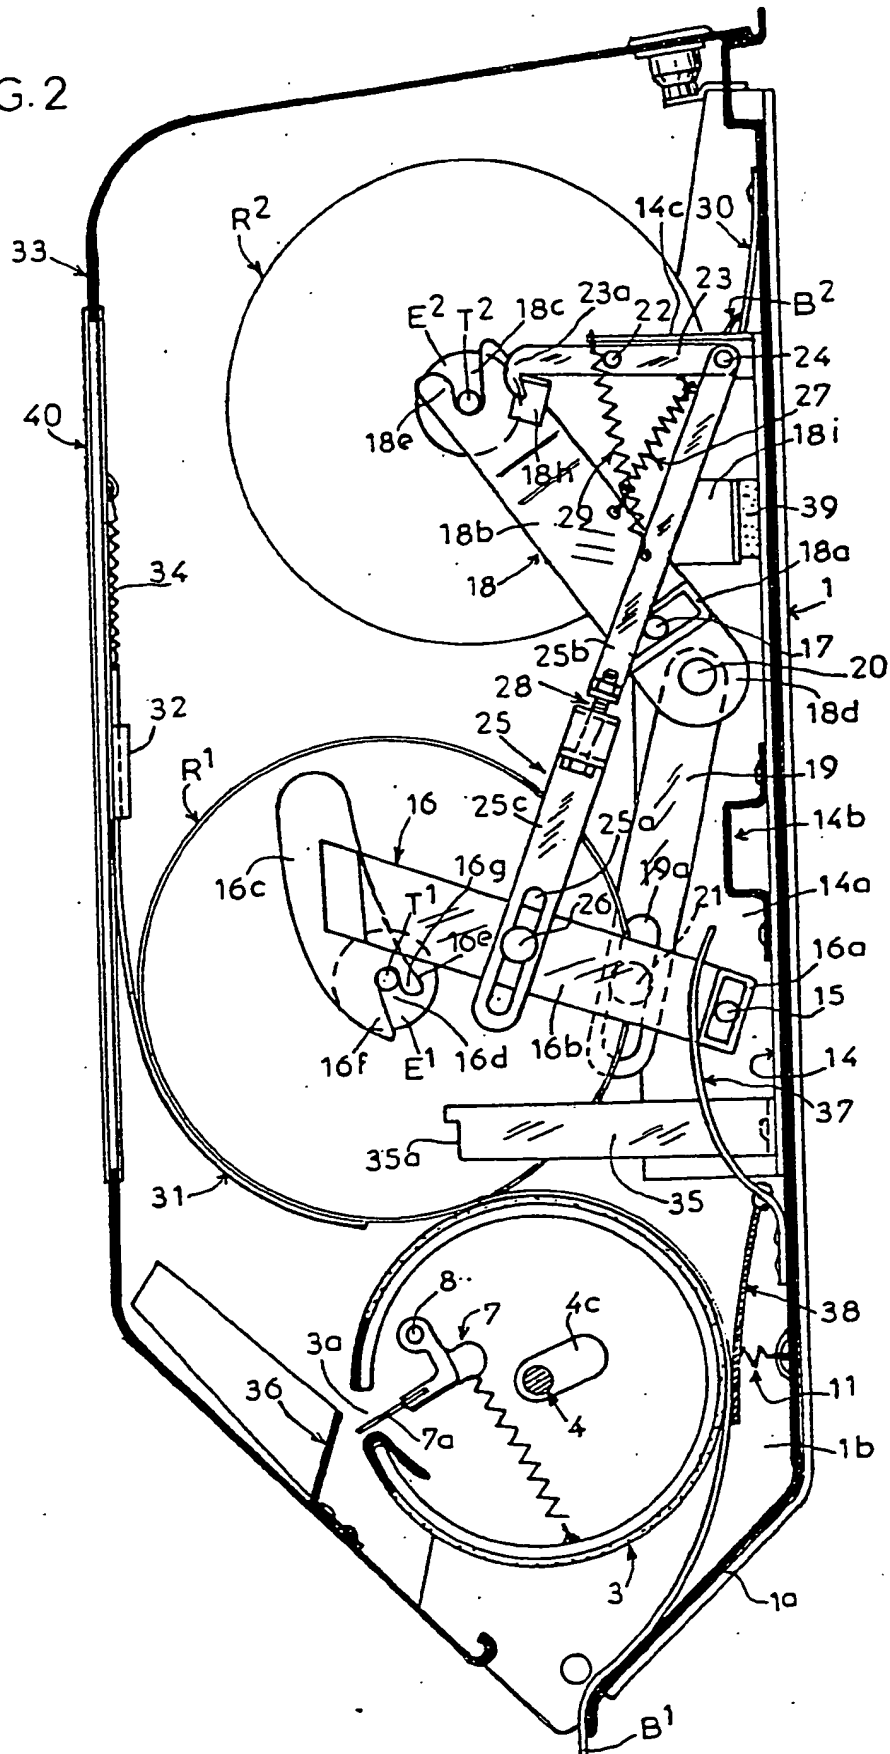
is a detailed cross-sectional view of a mechanical device, likely a cipher machine, showing two rotors, R1 and R2, and a complex lever and key mechanism. The device is housed in a rectangular frame with a top cover 1 and a bottom cover 1a. The left side features a vertical assembly with components 33, 34, 32, and 31. The right side includes a vertical assembly with components 30, B2, 18i, 39, 18a, 14, 18d, 20, 19, 14b, 16a, 15, 14a, 37, 38, 11, and B1. The top rotor, R2, has a central shaft 18 with a pin 18e and a contact 18c. The bottom rotor, R1, has a central shaft 16 with a pin 16g and a contact 16e. A lever 17 is connected to the bottom rotor and has a contact 17a. A key mechanism 14 is shown on the right, with a key 14a and a contact 14b. A spring 35 is located at the bottom right. A rectangular plate 36 is positioned between the two rotors. The bottom rotor is connected to a spring 3 and a contact 3a. The top rotor is connected to a contact 3b. The lever 17 is connected to a contact 17a and a spring 15. The key mechanism 14 is connected to a contact 14b and a spring 14a. The device is shown in a perspective view, with the rotors and lever mechanism clearly visible.
